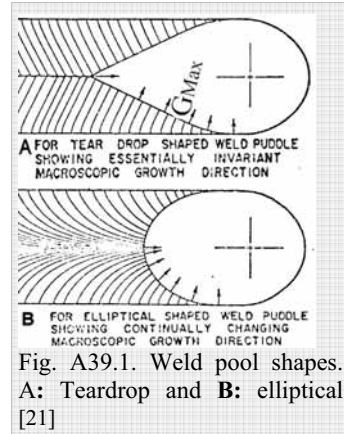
Weld pool shapes. A: Teardrop and B: elliptical [21]
